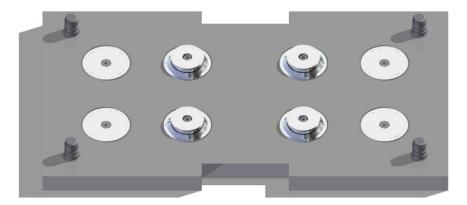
Fixed plate assembly with four core inserts and four blocked inserts
